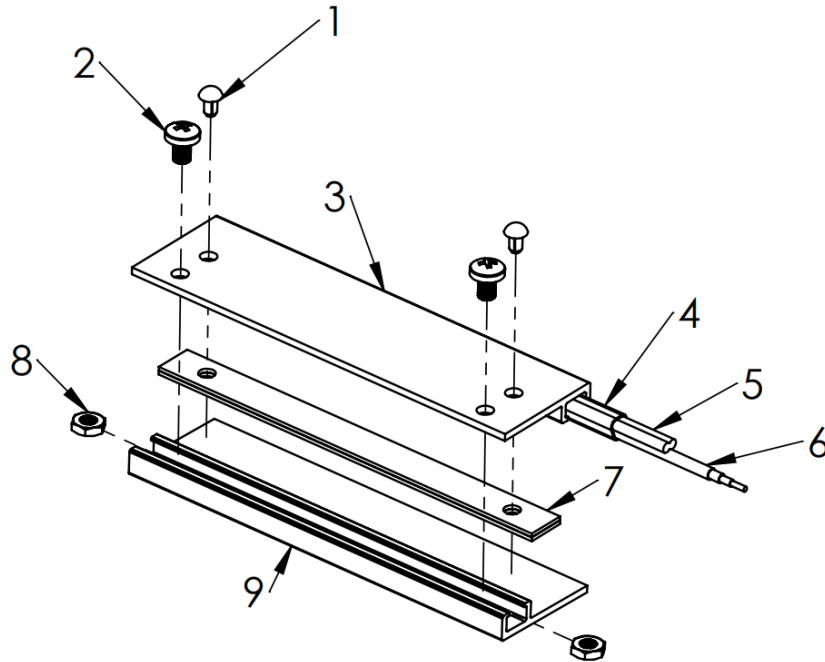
Exploded view of the piezoelectric sensor construction. 1 – Rivet DIN7337 3,2x6, 2 – Bolt DIN7985 M4x6, 3 – Aluminum profile with holes, 4 – Thermo tube, 5 – Cable with two wires, 6 – Piezoelectric cable, 7 – Two aluminum tapes, 10x2, 8 – Nut DIN934 M4, 9 – Aluminum profile without holes
